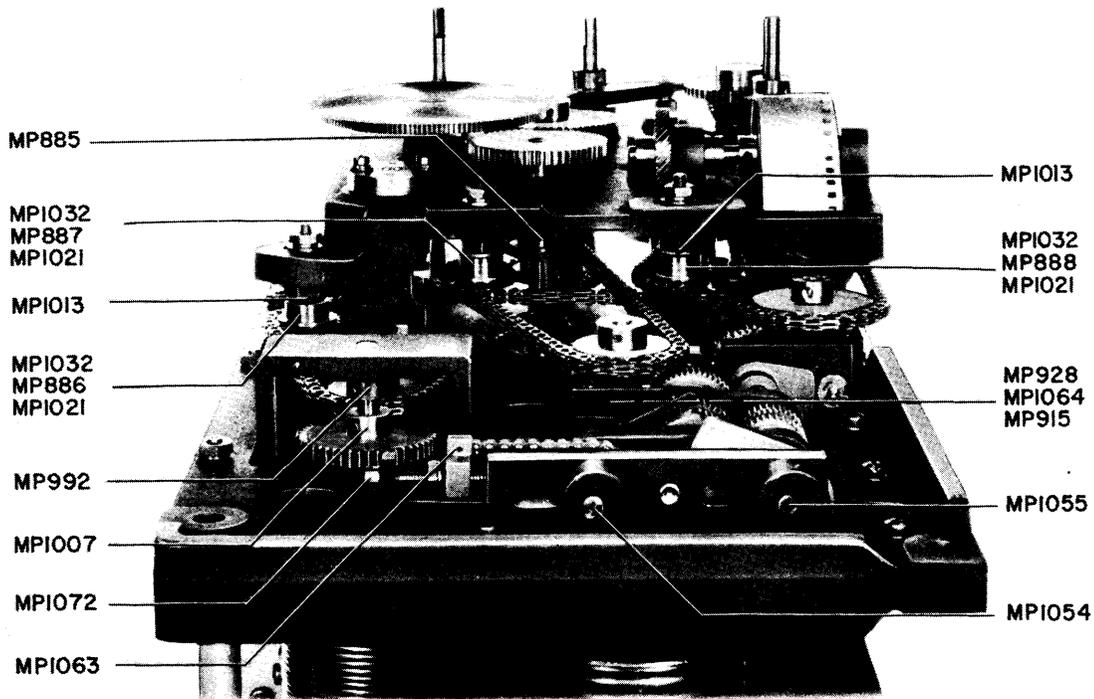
Tuning and Coupling Mechanism, Location of Parts Visible from the Top
